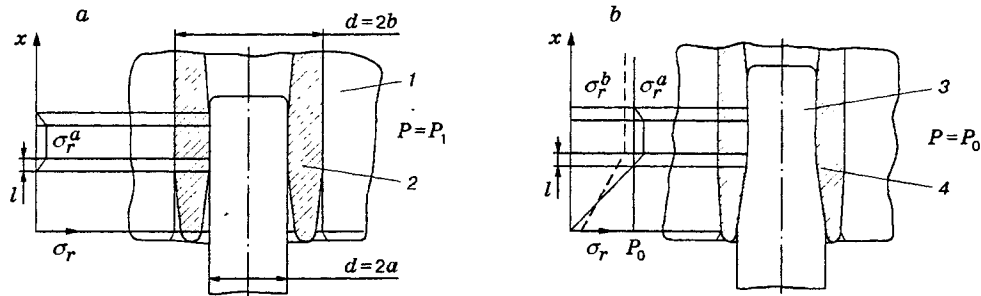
Contact stresses and deformations of elements in the case of sealing with external support for the initial (a) and final (b) stages of compression; 1) support element (segment); 2) cylinder; 3) rod; 4) layer of a soft metal (indium).
